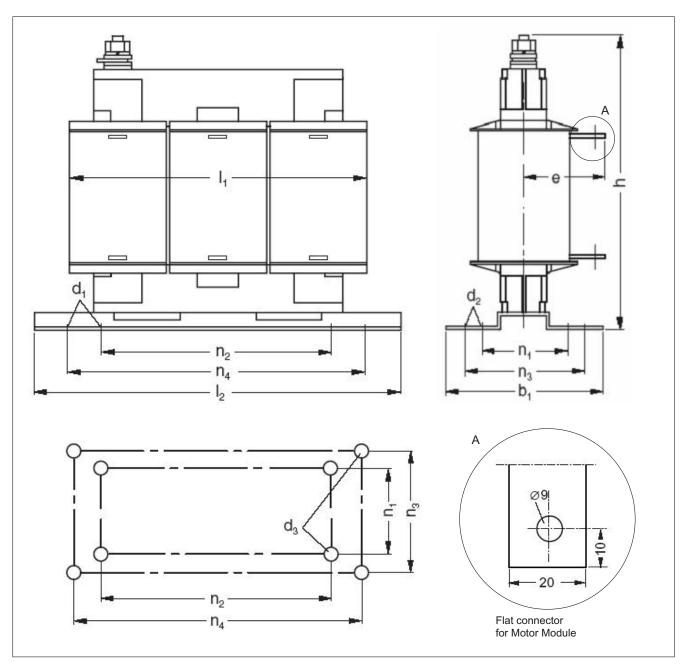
Dimension drawing and mounting hole of motor reactor 60 A (6SL3000-2BE26-0AA0)
